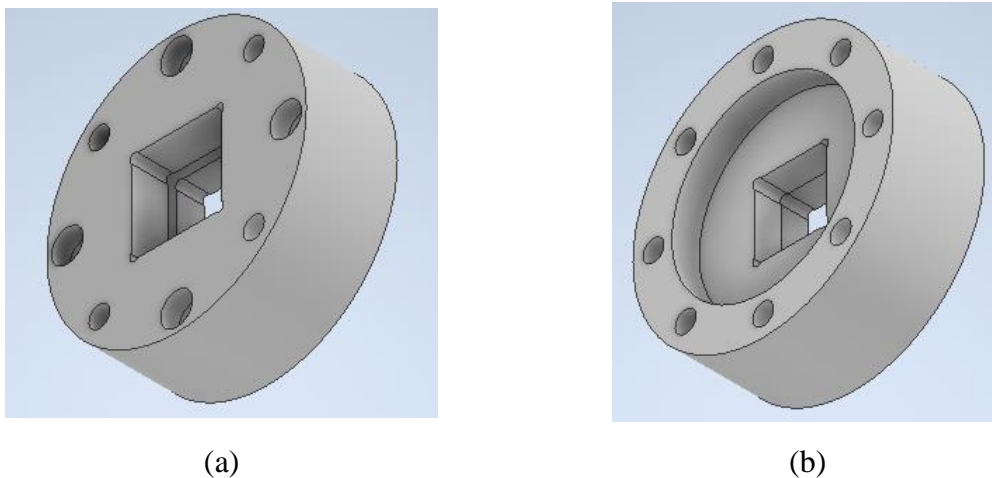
(a) Top of the attachment part; (b) Bottom of the attachment part.
